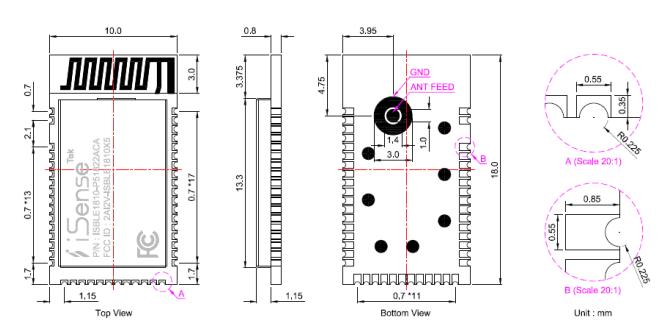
Product Dimensions (ISBLE1810-P51xxxxxA)
